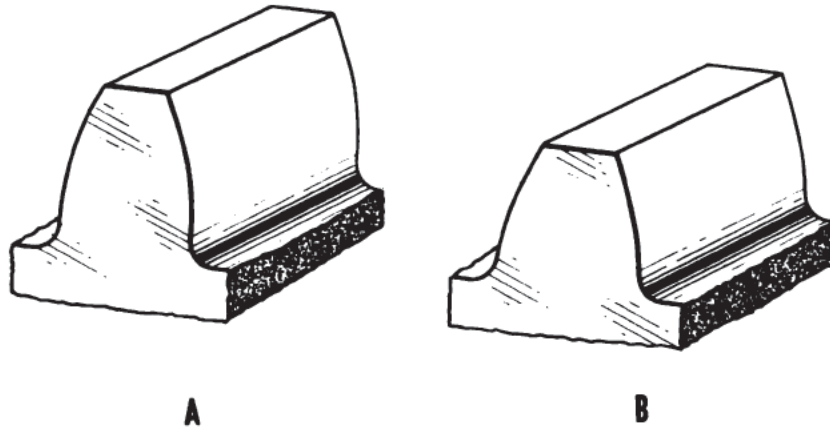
A. A standard 14½° spur gear tooth. B. A 20° spur gear stub tooth.
